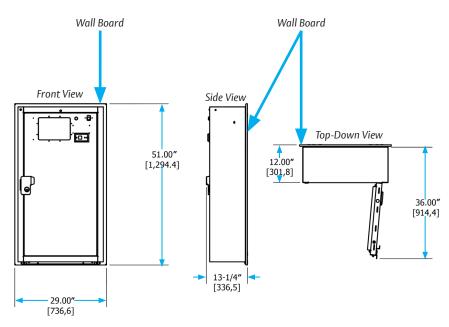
Typical wall-mounted cabinet dimensions agreement
